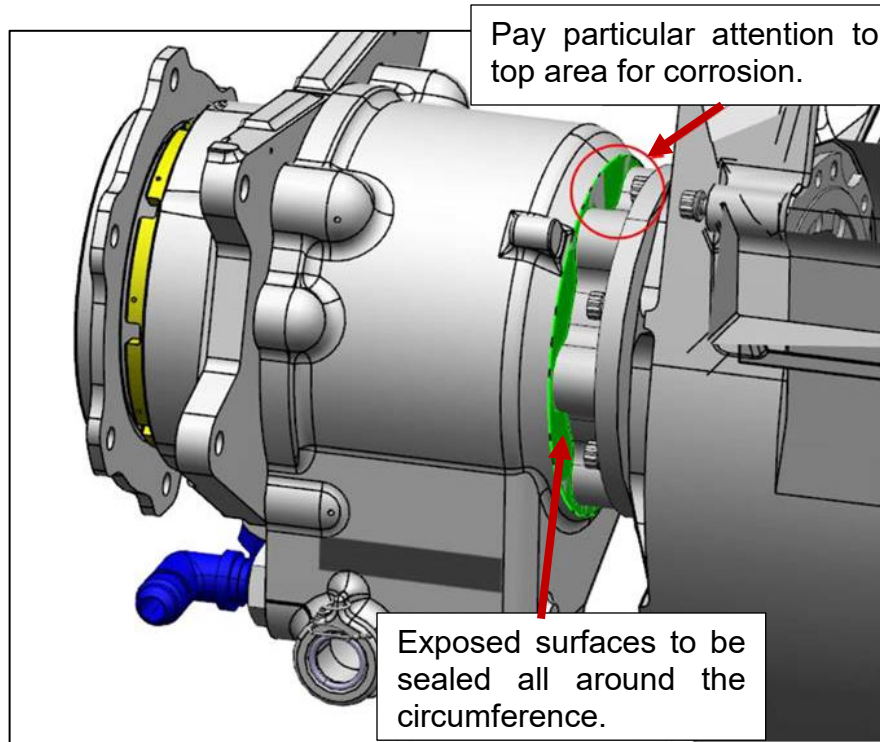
Freewheel Housing Depicting Exposed Surfaces
